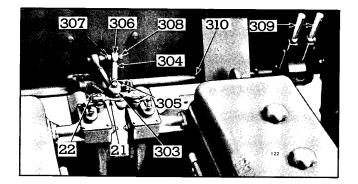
Throttle Control Mounting (Side-by-Side Twin Unit)
